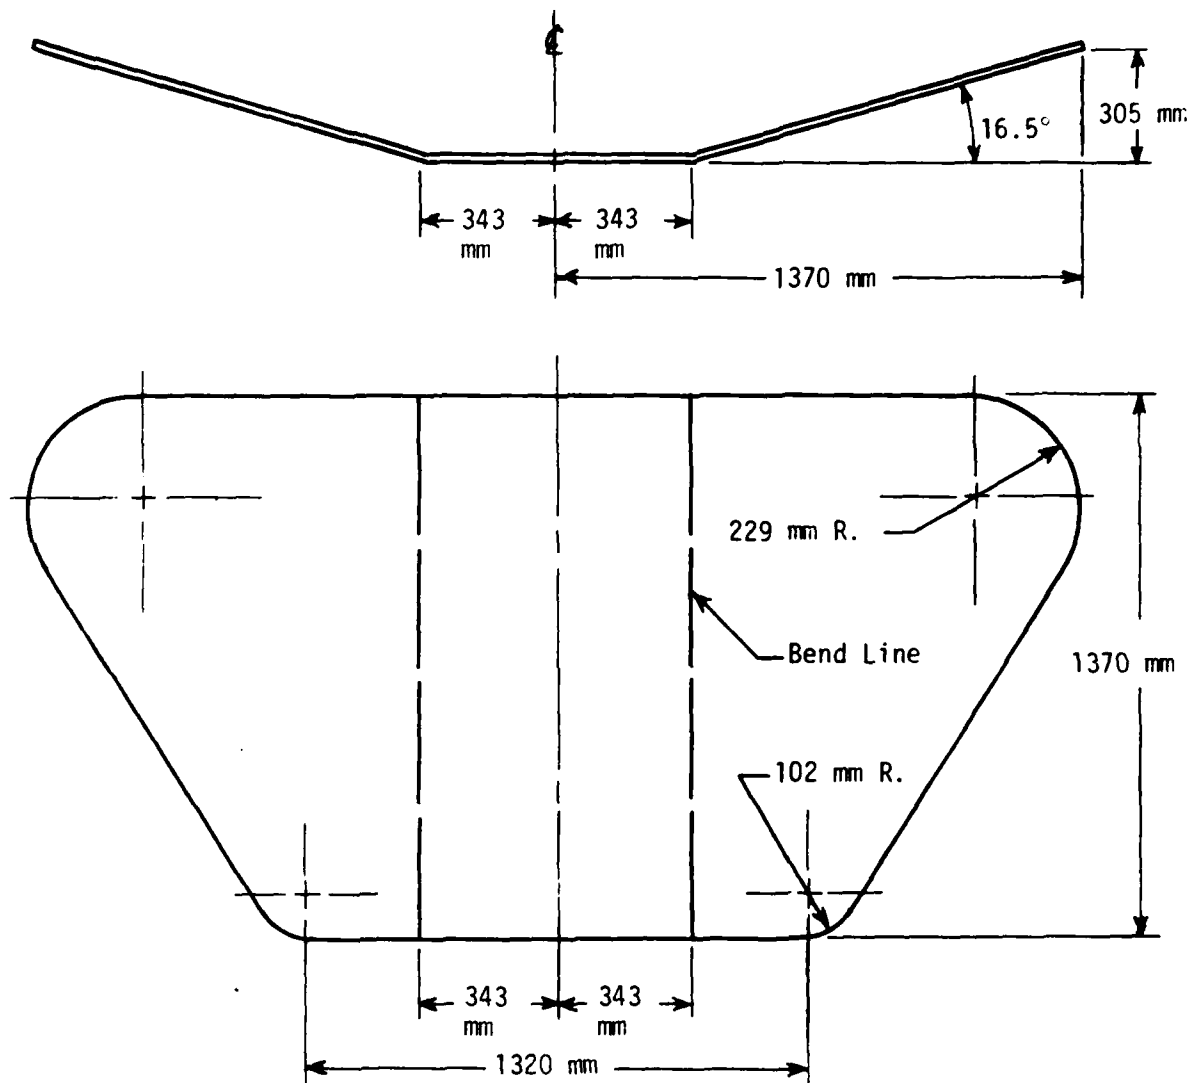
FRONT VIEW OF HEAD SHIELD PLATE
